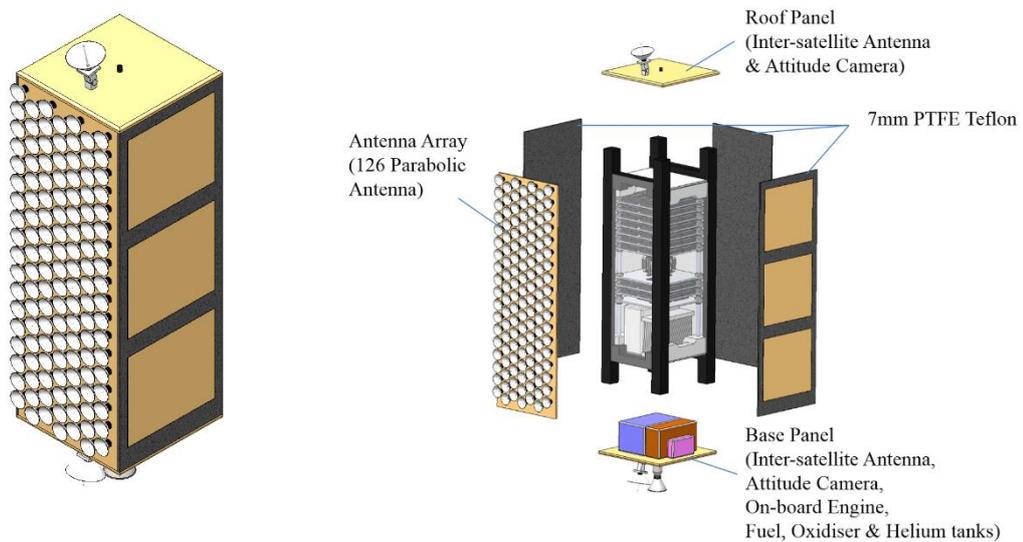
a) CAD of Main Frame assembled b) Exploded view.
